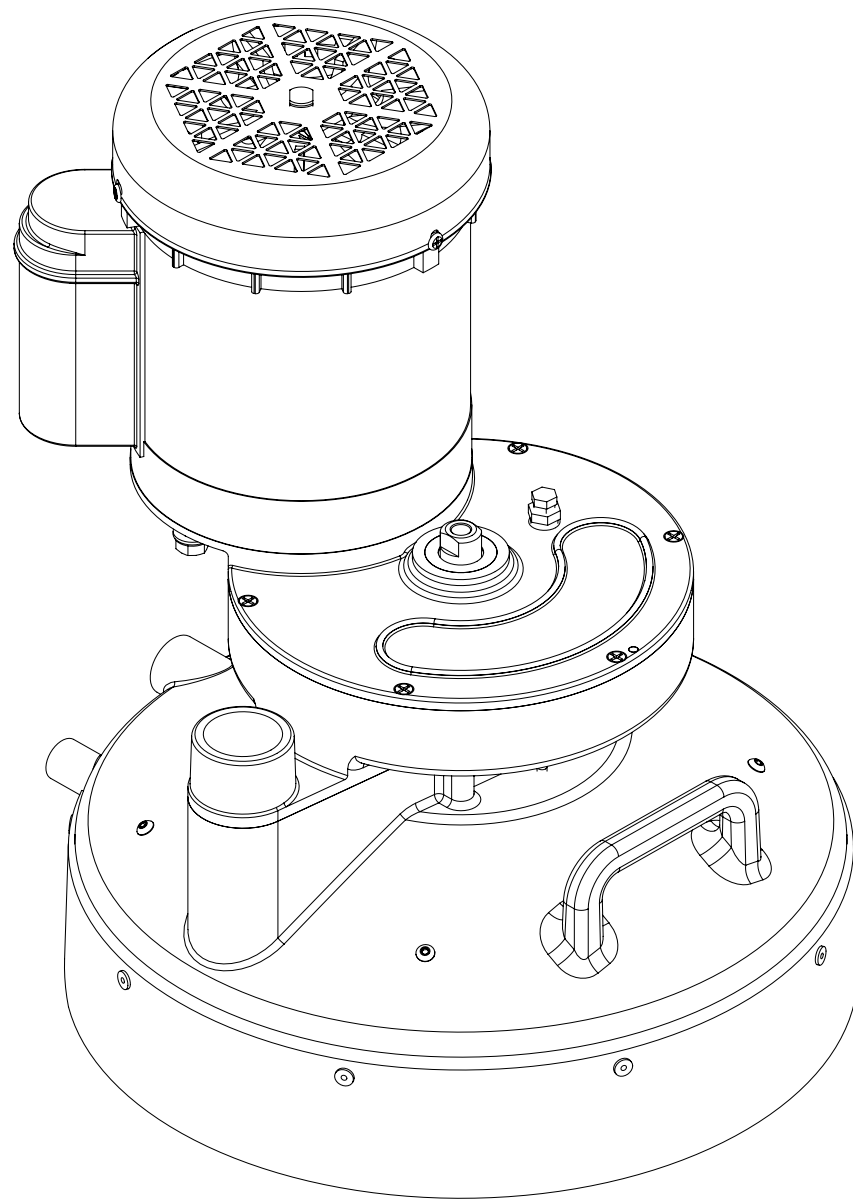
Base and Drive Train Assembly - View 1 of 2
